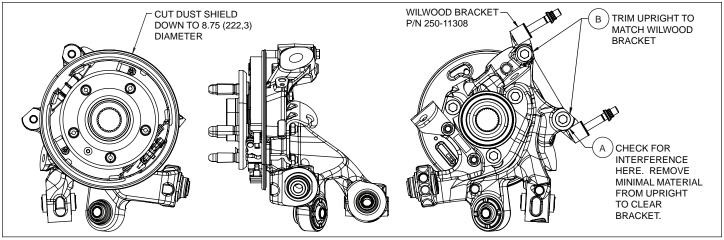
Backing Plate / Dust Shield / Caliper Mounting Tabs Modifications
